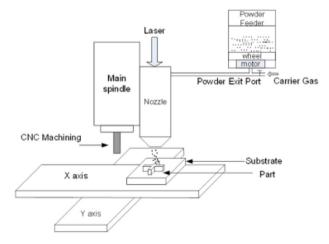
A hybrid manufacturing system: laser deposition for material deposition and CNC milling for material removal.
